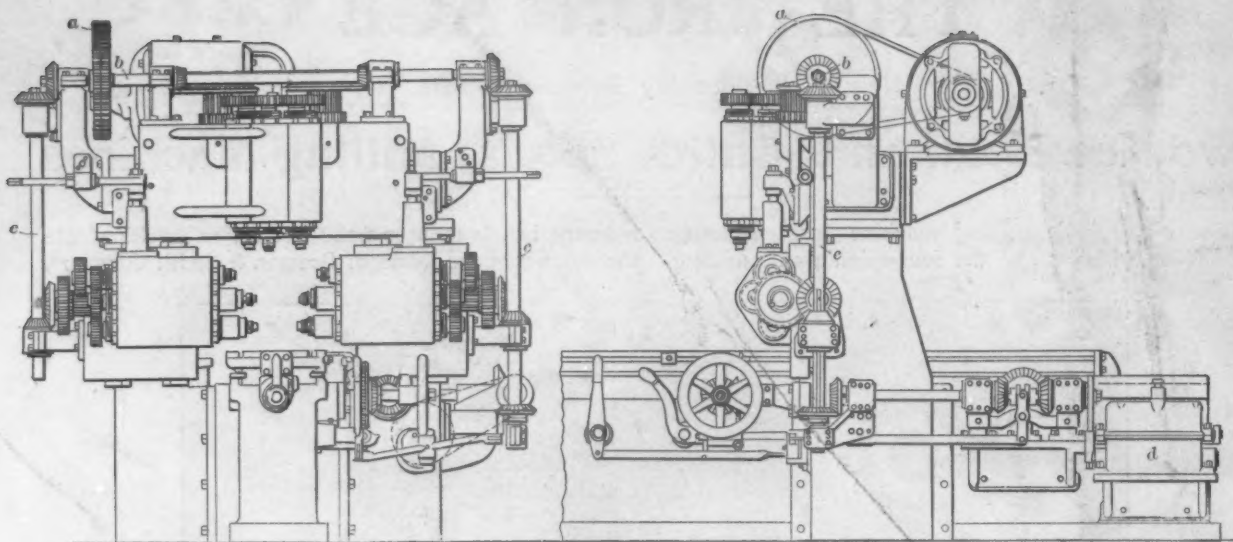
End and Side Elevations, Showing the Details of the Mechanism of the Beaman & Smith Nine-Spindle Milling Machine.
